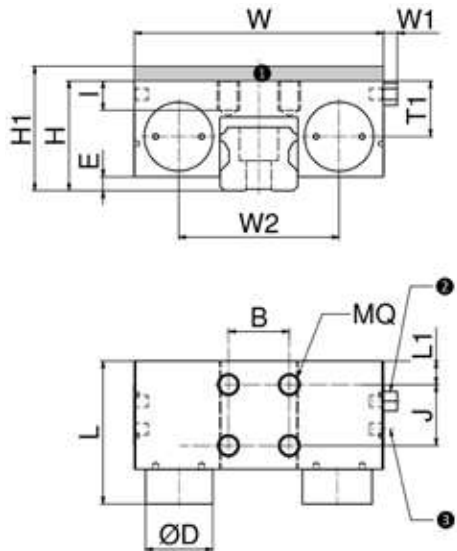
Passive pneumatic clamping elements for Standard Linear Guides
